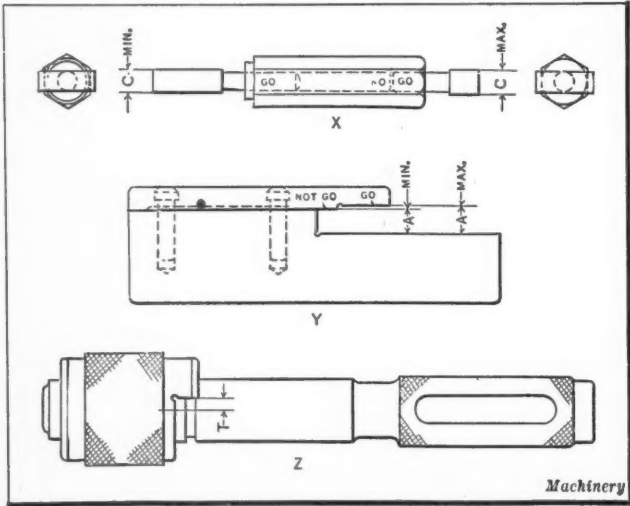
(X) Gage for inspecting Width of Reamer Slots; (Y) Gage for determining Width of Arbor Lugs; (Z) Gage for testing Alignment of Lugs on Collar
